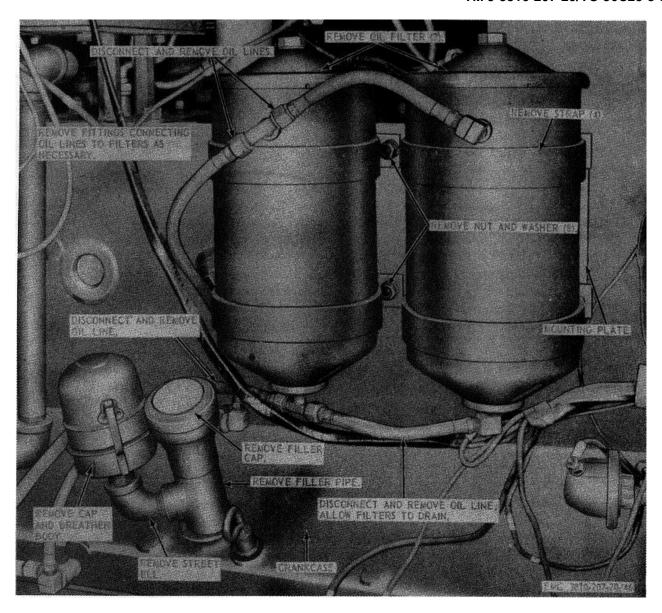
Oil fitters, crankcase filler, and breather, removal and installation.
